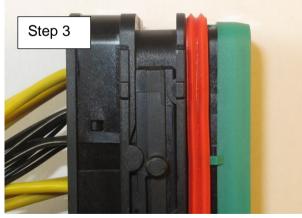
Moving the TPA on the Female Connector Assembly to the Pre-Load Position
